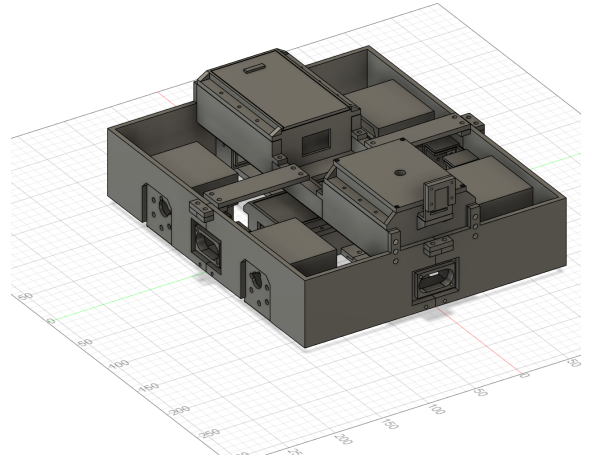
Fully assembled 3D-printed chassis with modular electronics and mecanum drive.
